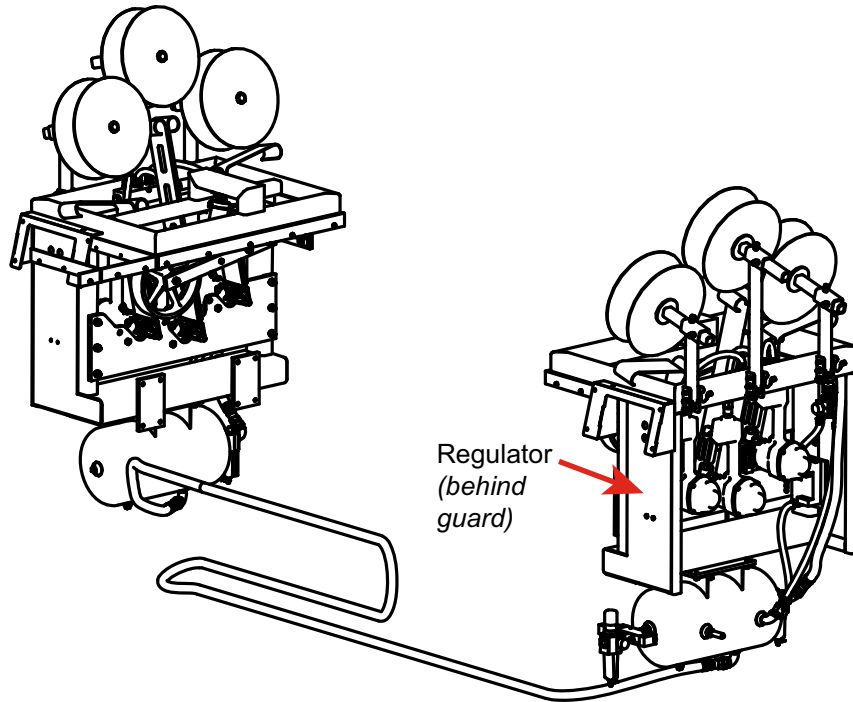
Power Framer Regulator for Clamping Motor Air Clutch
